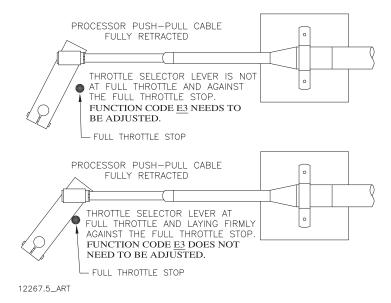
Throttle Push-Pull Cable Full Throttle Position
